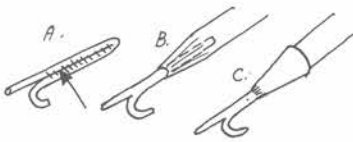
The boat hook is formed from wire and soldered (A), shaped and set in its handle (B), and a socket of metal or paper fitted (C).
